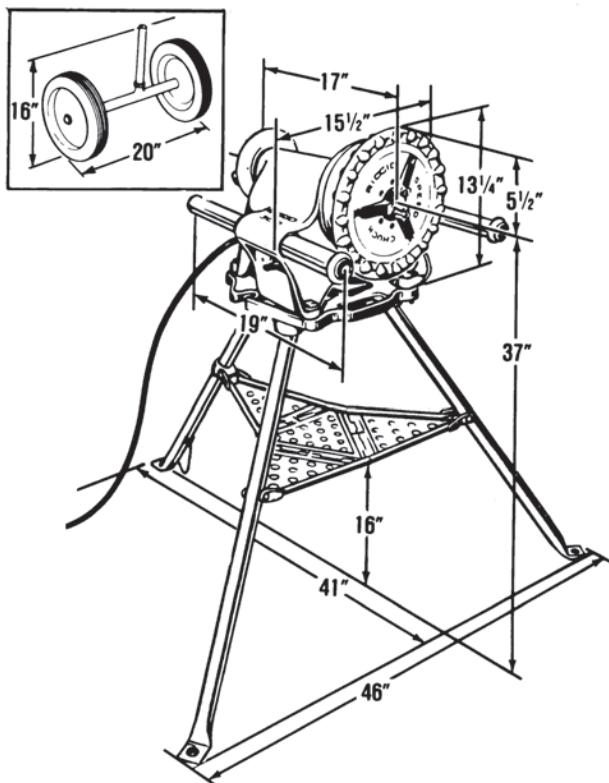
300 Power Drive and 1206 Stand Approximate Dimensions
